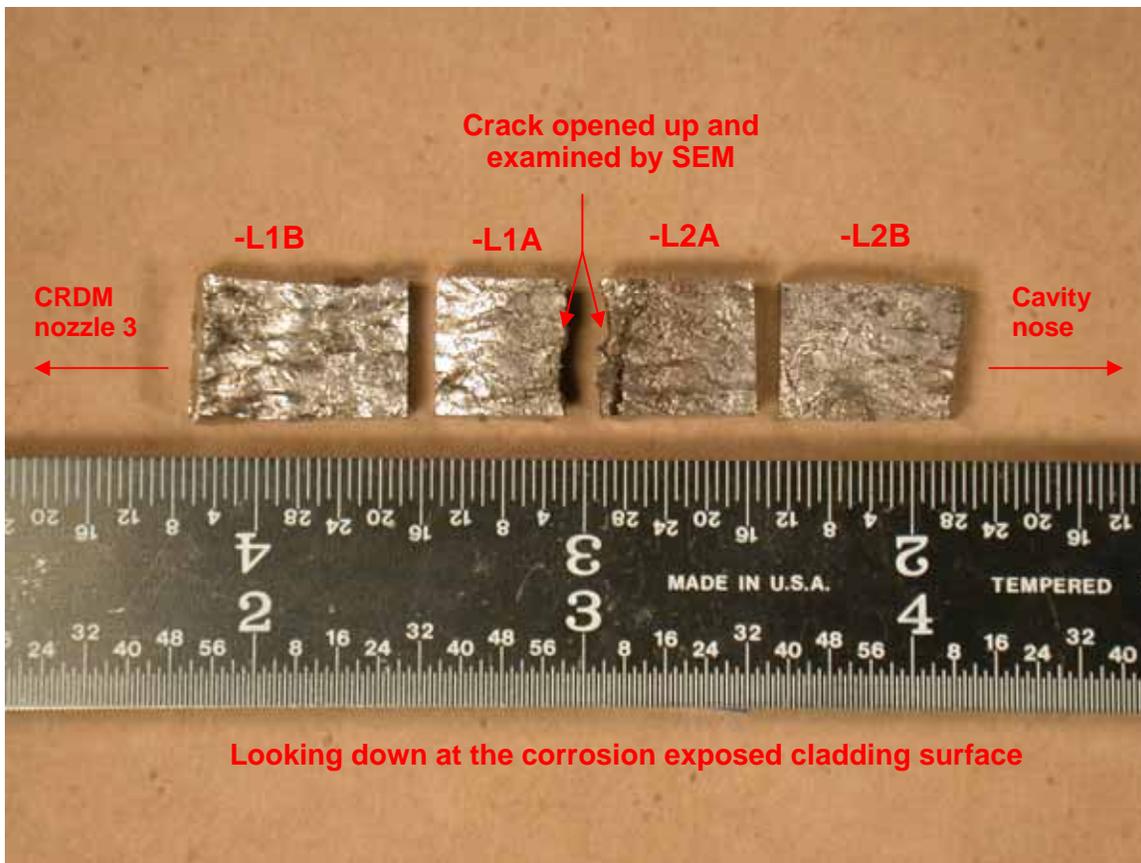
Section photo for Piece A2A7L. The main crack located near the center of A2A7L was opened in the laboratory, resulting in Pieces A2A7L1 and A2A7L2. Additional sections, which created the -A and -B pieces, were made to facilitate the SEM examinations. The surfaces examined by SEM are indicated.
